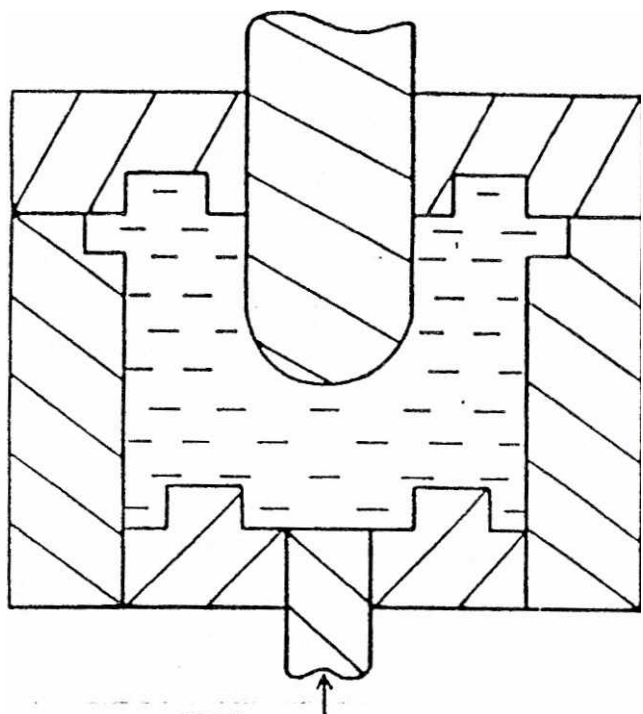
STEPS IN PRODUCING SQUEEZE CASTING
